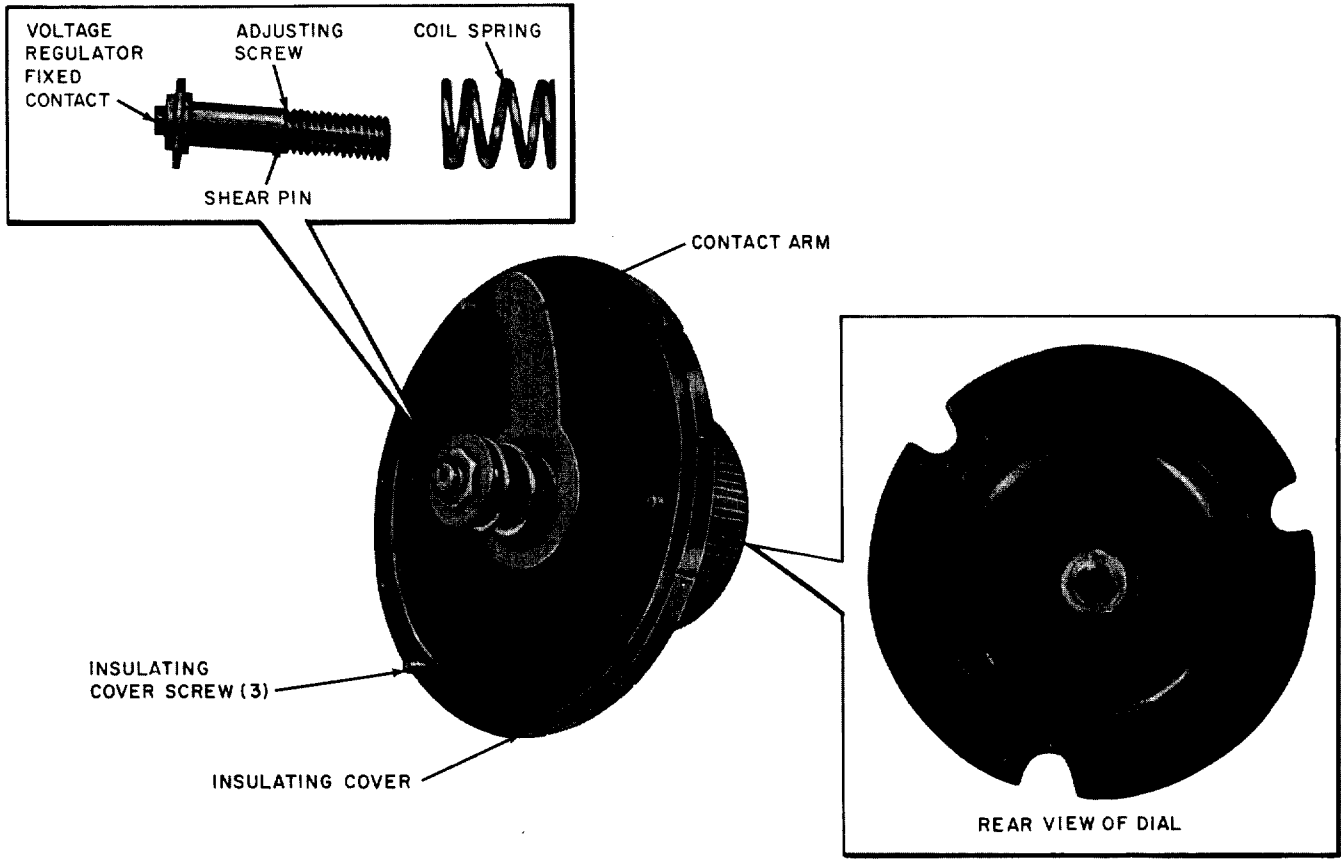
Insulating Cover Assembly Details With Fixed Contact & Adjustable Mechanism
